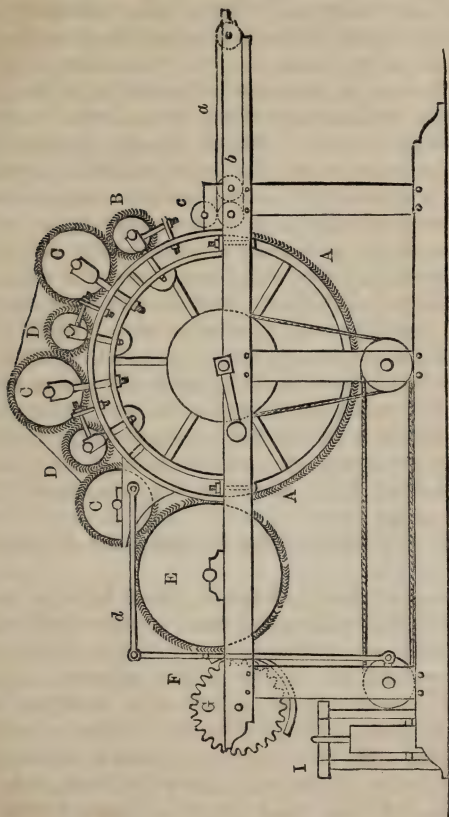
Carding Engine, surmounted with Urchin, or Squirrel Cards.
